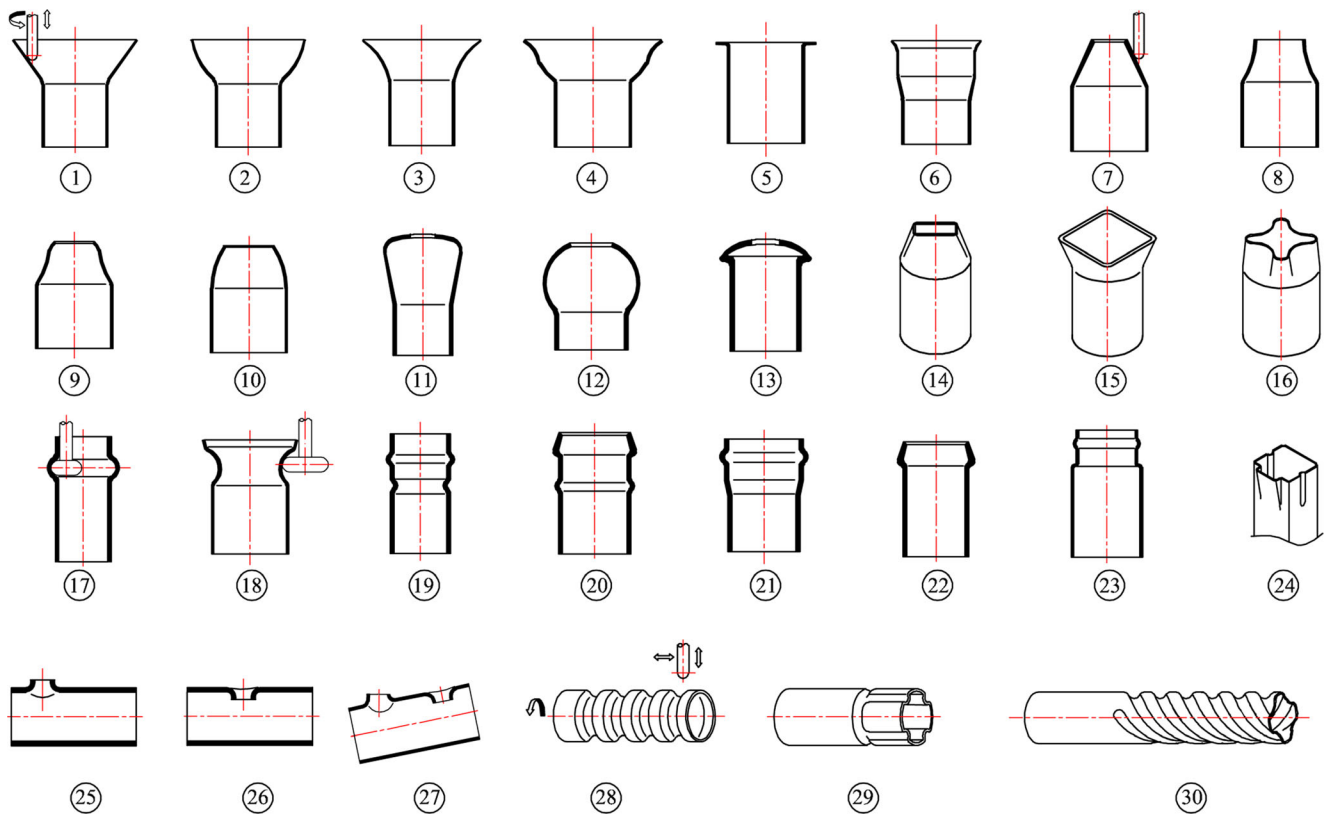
Schematic illustration of tubular parts made by incremental forming
